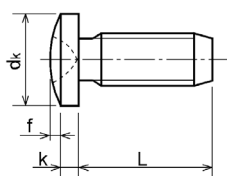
/7) MECHANICAL STANDARD PARTS (SCREWS)
